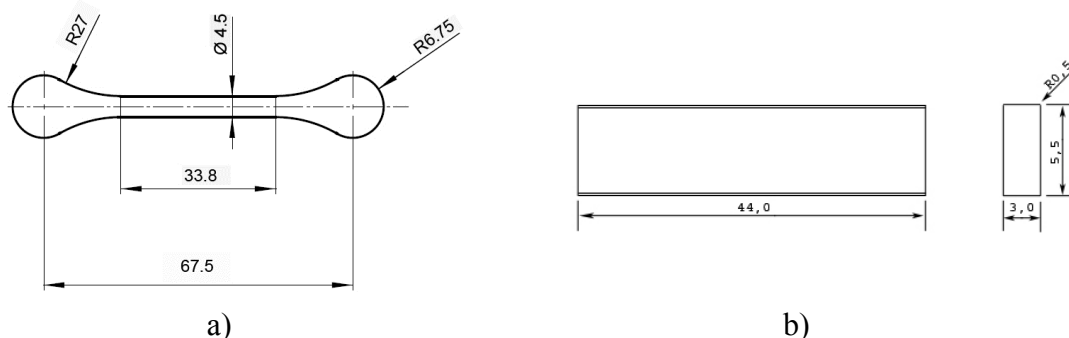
Geometry and dimensions after sintering in mm of tensile (a) and fatigue (b) test specimens.
